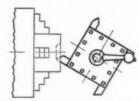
Same tool shown in photos No. 1 and No. 2 being used for inside chamfer.
